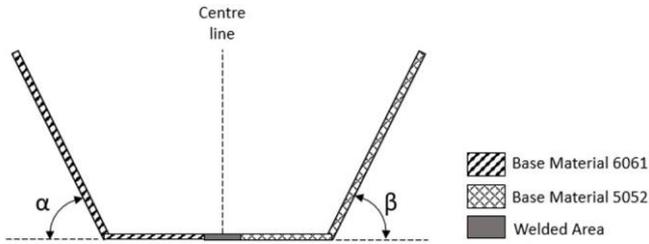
Illustration of measurement sections on formed dissimilar material of TWBs
